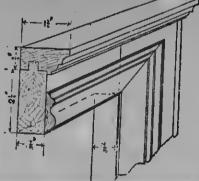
Part of Framing of Combined Fitment, showing Mouldings in Section.
